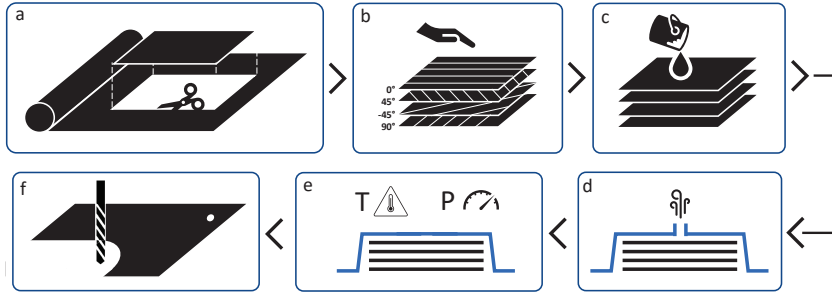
Manufacturing steps: (a) cutting, (b) placing, (c) infusing the resin, (d) compacting, (e) curing and (f) machining [19].
